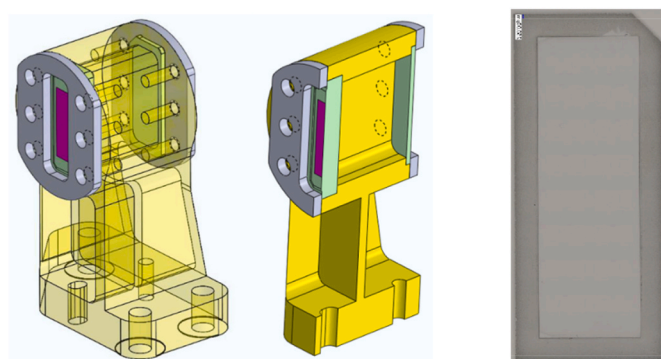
Preliminary 3D drawing of filter-slit-assembly and freeform corrector plate in their holder (left) and real-scale FFCP prototype (right).
